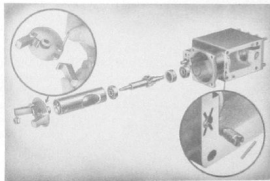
Assembling and Installing Fly-Weight Head Assembly Into Governor—Composite View
